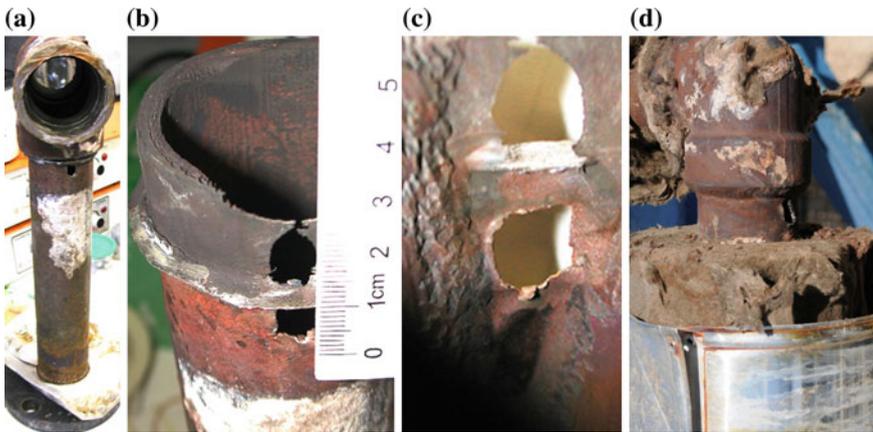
a The tube connection (T) with the hole. b Holes (outside view). c Holes view from the inside (signs of erosion around holes). d The hole in the tube bend with lack of thermal insulation
